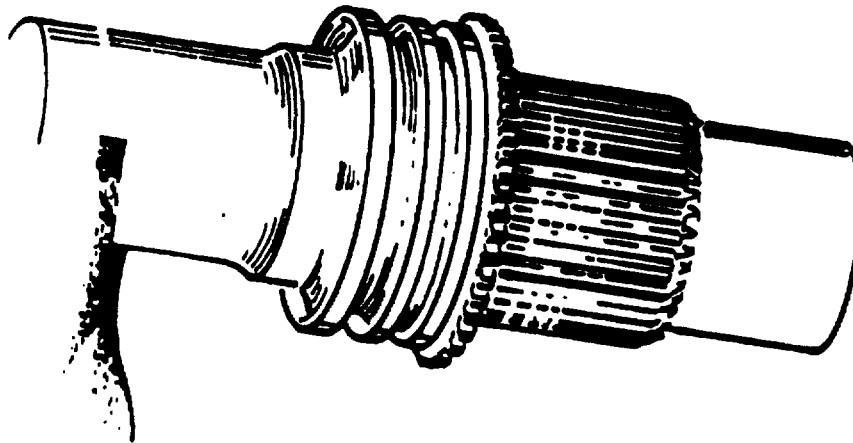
Adjusting Shims-Upper Mast Bearings
